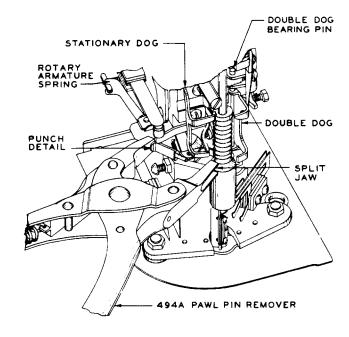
Method of Inserting the 494B Pawl Pin Remover Showing the Shoulder of the Punch Detail in Line with the Vertical Edge of the Casting Which Mounts the Rotary Pawl Guide
